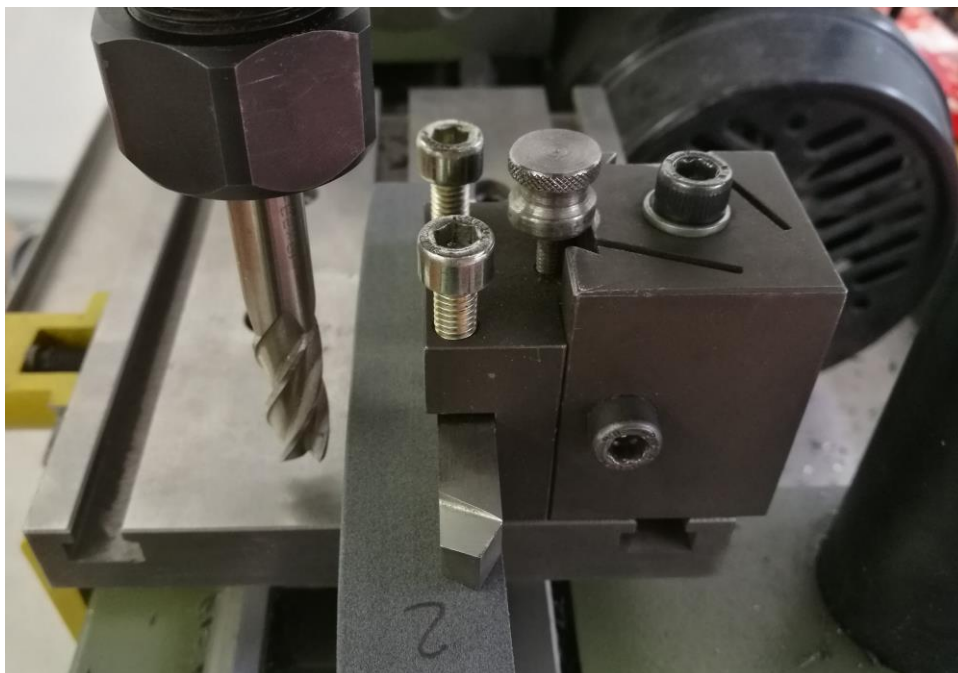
Straightening of the opposite side to the rounded V-notch of a specimen using the “Proxxon PF 360” milling machine.
